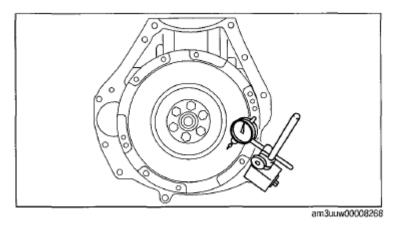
Measuring Surface Clutch Disc Runout Using Dial Gauge
